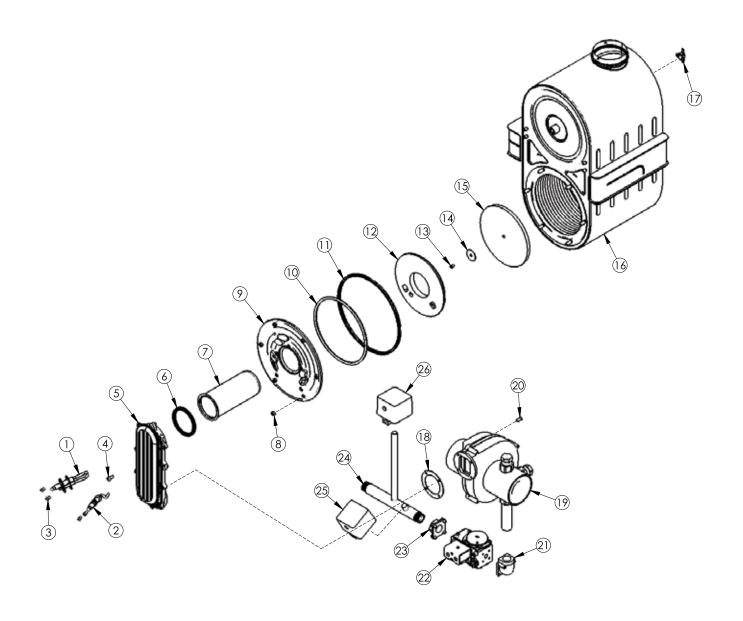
Heat Exchanger/Burner Assembly Repair Parts – PFC-460
